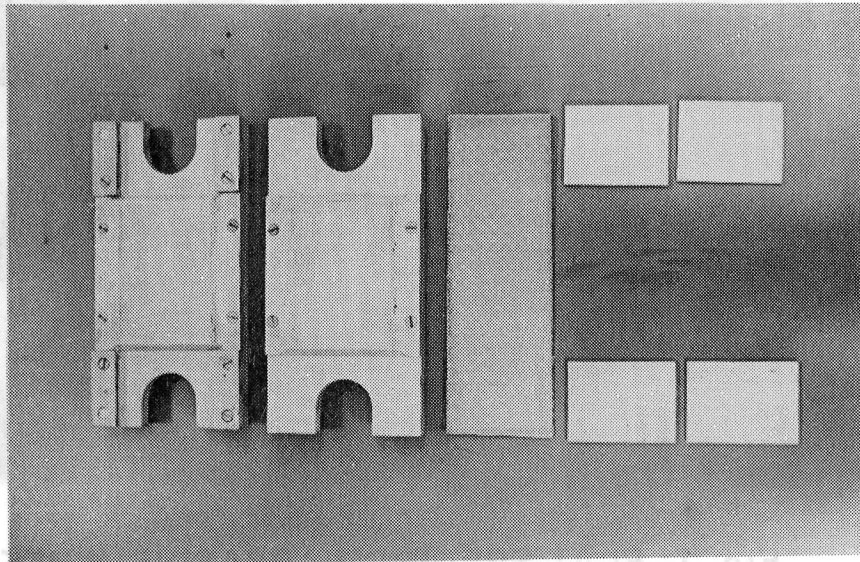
TENSION SAMPLE and END GRIP FIXTURE
